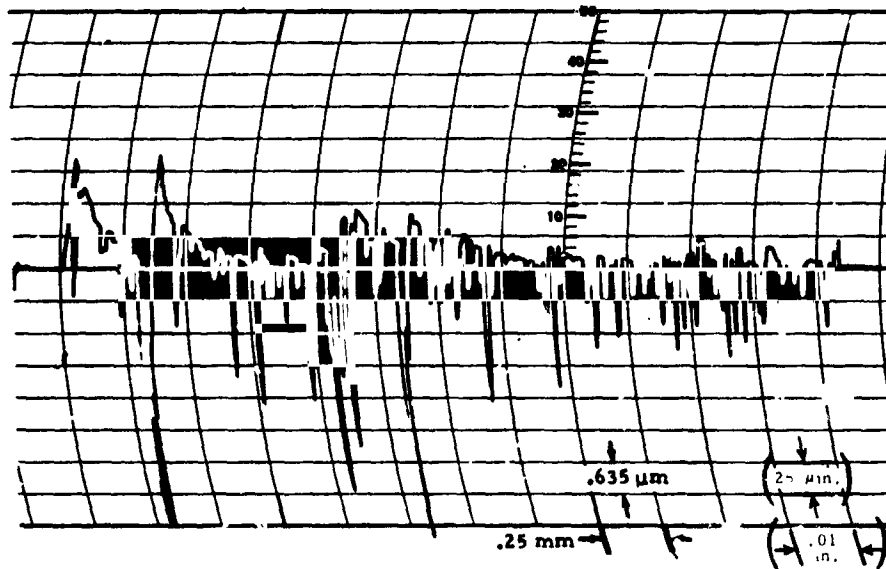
Aft Rotating Ring Seal--Roughness Trace of Axial Sealing Face of Carbon Ring After Test V.
